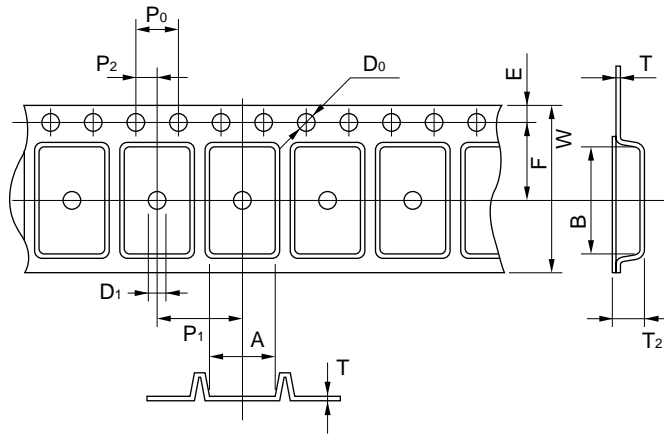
SOT-89 Tape Dimensions (12 mm embossed-type carrier tape)
